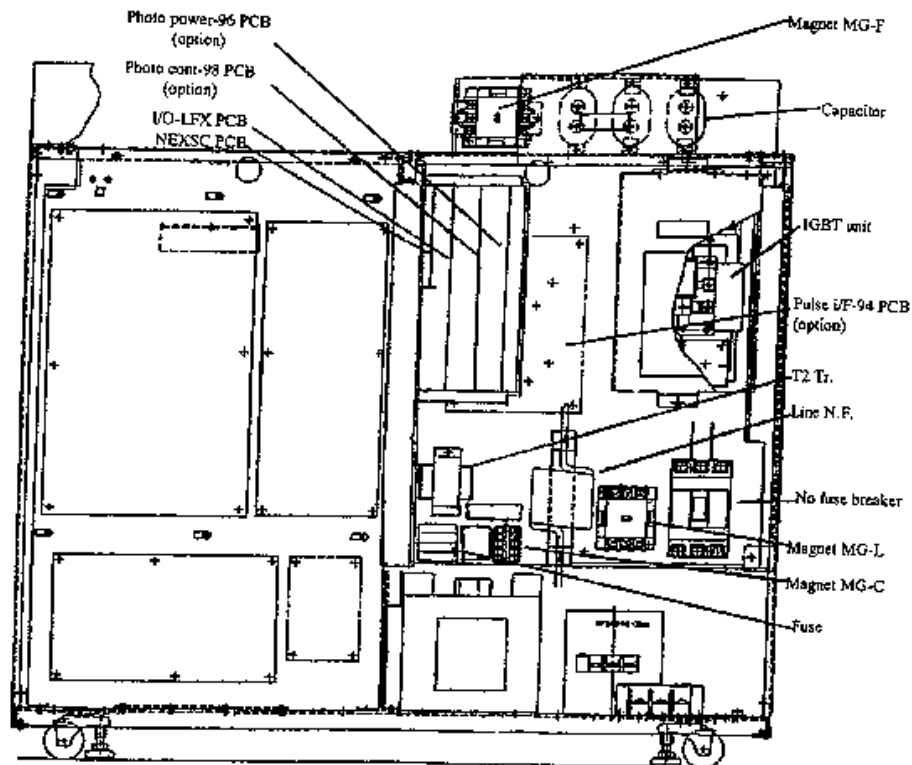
Front view of UD150L-30/FX (open swing panel)
